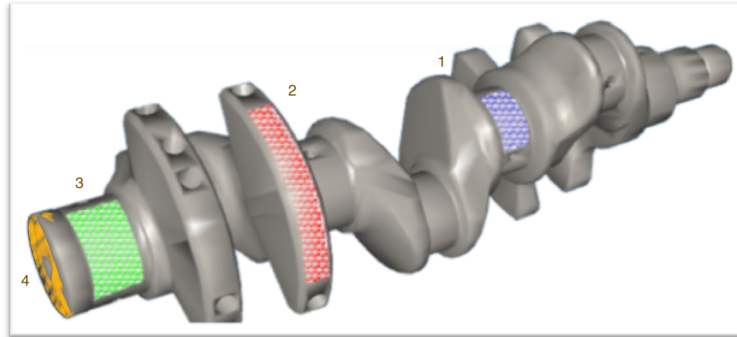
Zones over a mechanical engine part: the crankshaft.
